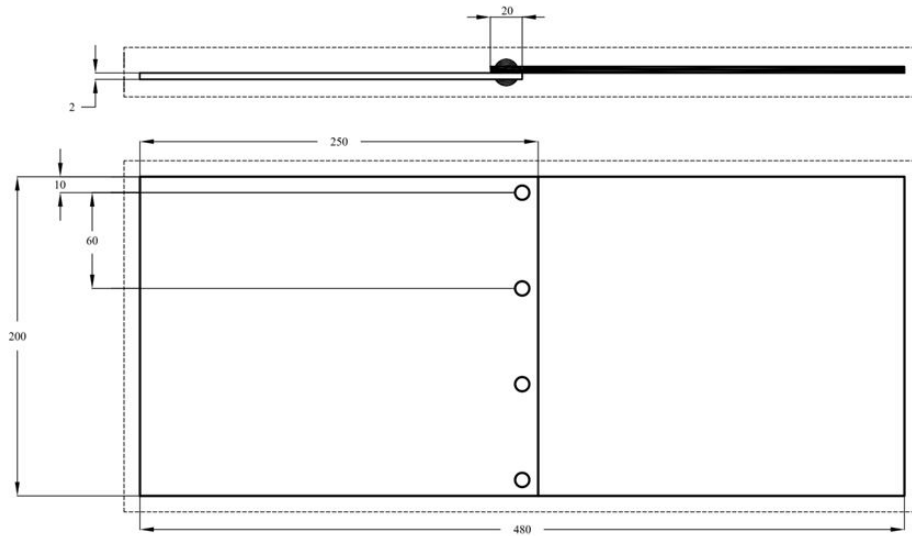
The geometry of the riveted lap joint 172×110mm (96 x 96 DPI)
